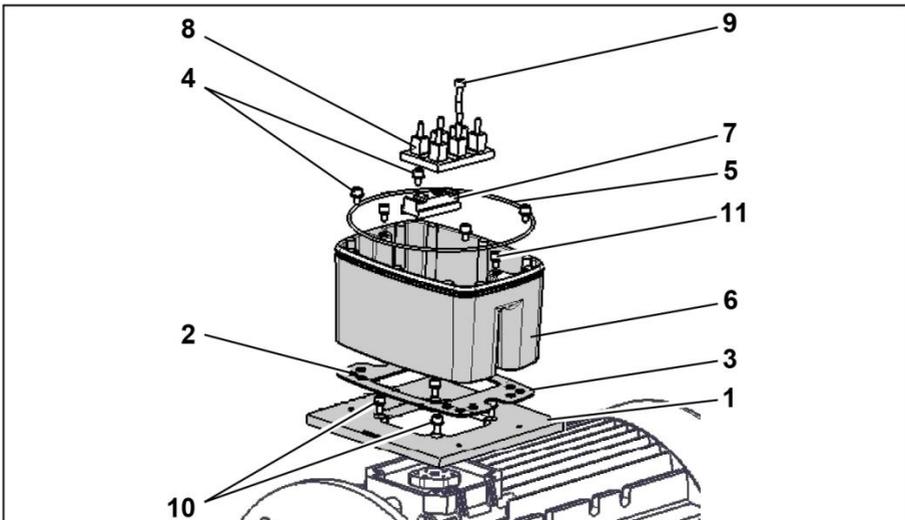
Assembly sequence: Connection box - Adapter plate size D
